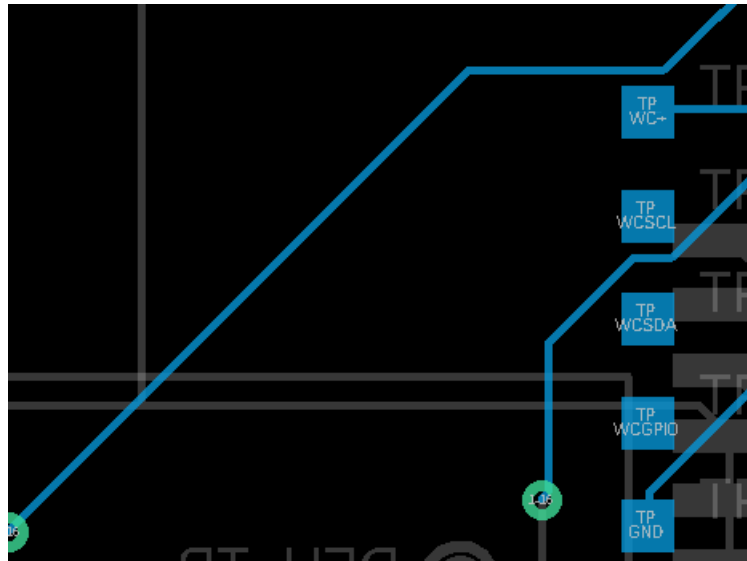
Adafruit Qi Wireless Charging Module Contact Points on New PCB
